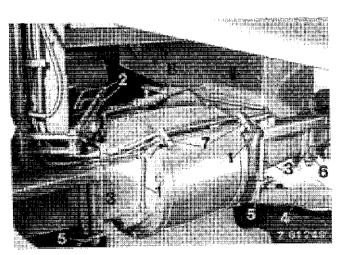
Front Axle before Removal (Combines 925 and 935)
